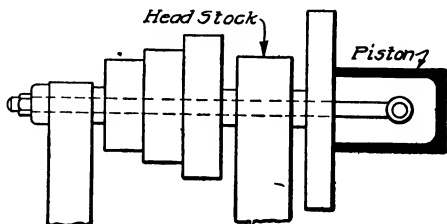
Rigging for Holding Piston against Face Plate of Lathe
